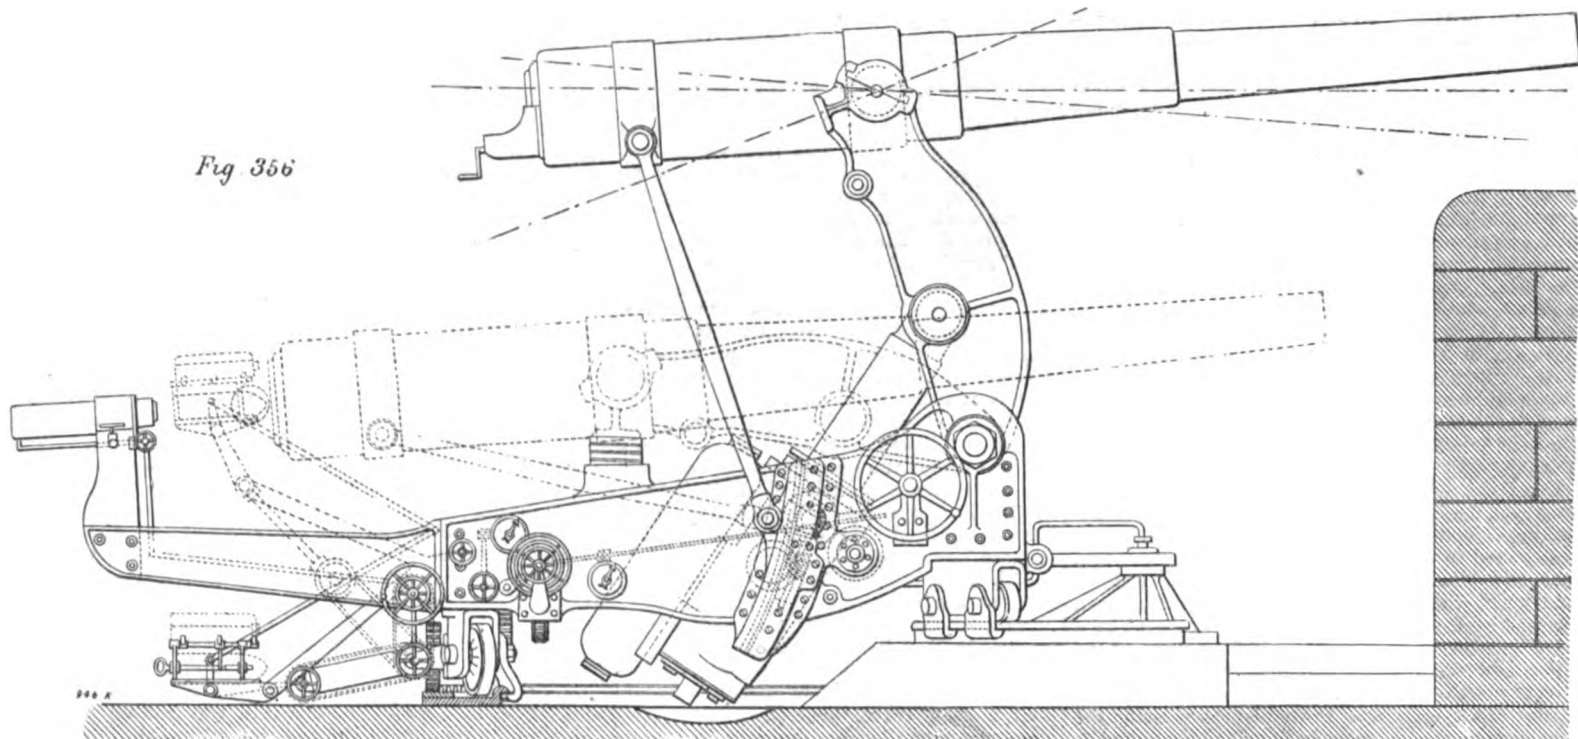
PNEUMATIC DISAPPEARING CARRIAGE FOR 10-IN. GUN.
